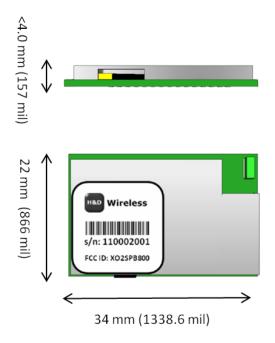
Mechanical drawing, SPB800P module with solder pads
